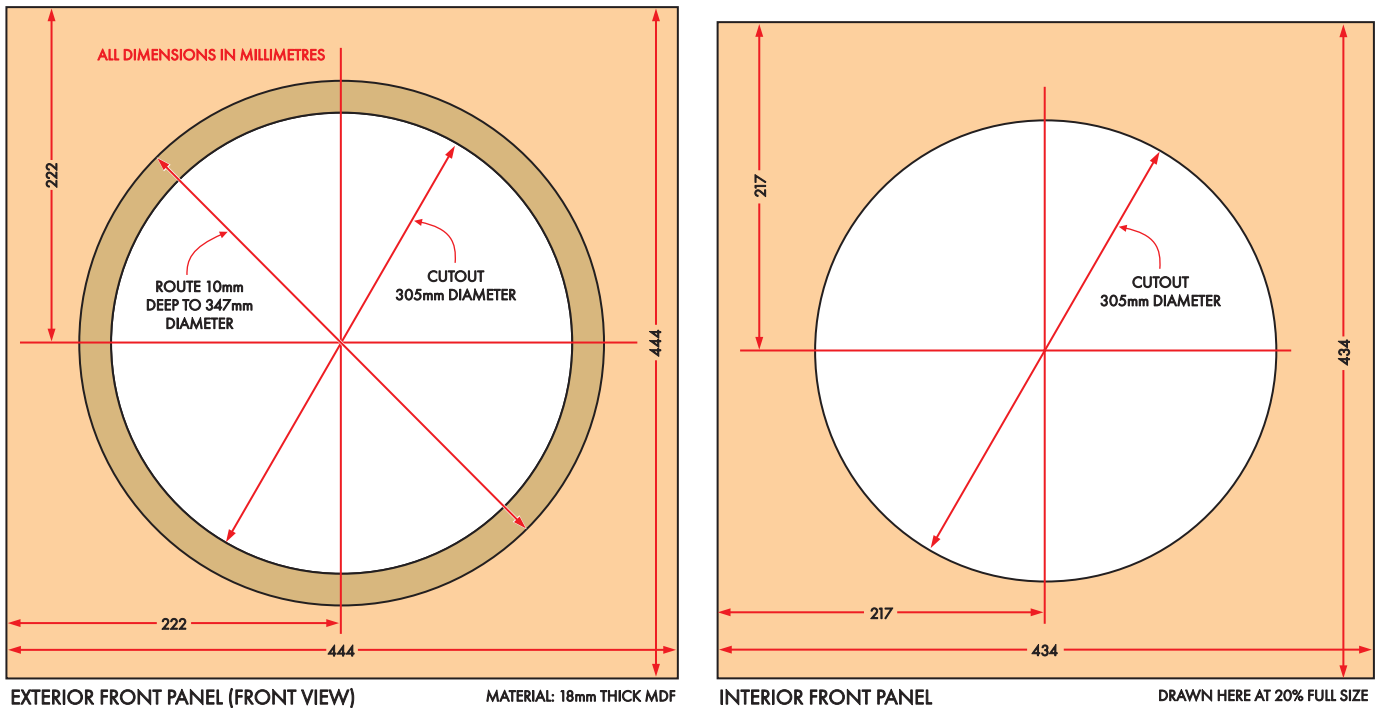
similar to the rear panel, the front panel is two pieces of MDF glued together. See our hints on how to make a jig to route the circular rebate and cut the hole neatly.
